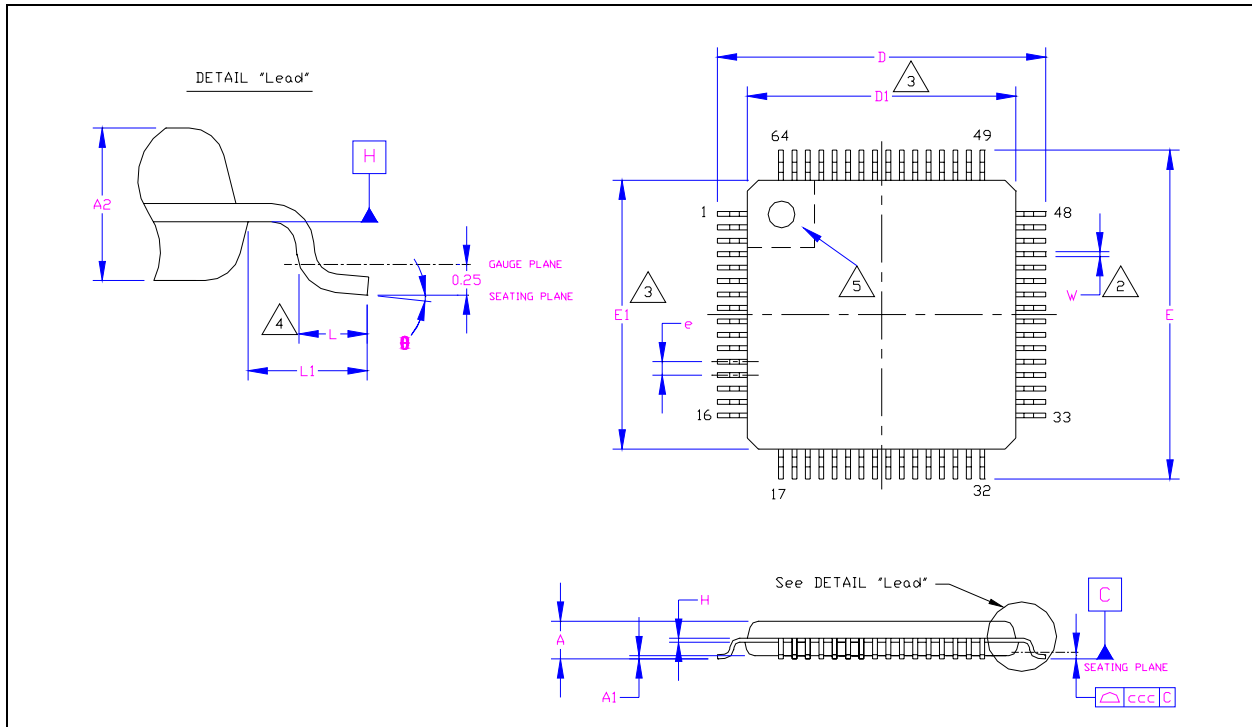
64 Pin STQFP Package Outline, 7X7X1.4 Body, 2 MM Footprint
